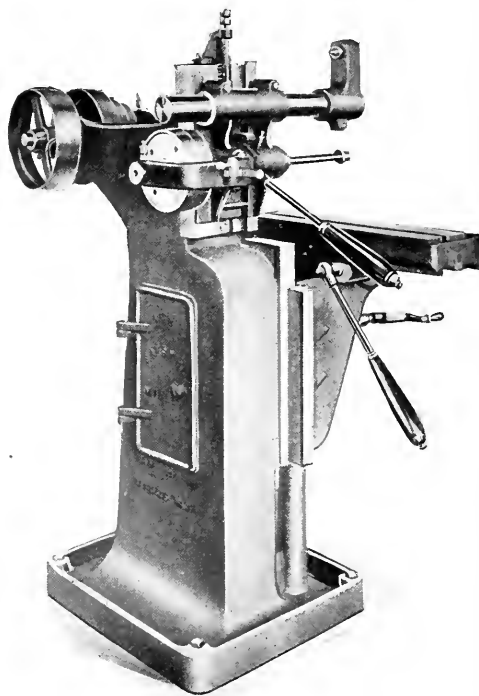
Rear View of Garrigus Miller showing Arrangement of Drive
